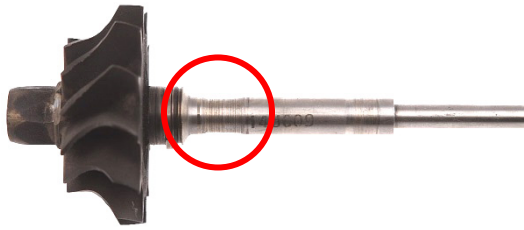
Deep scratches on the shaft caused by contaminated oil
